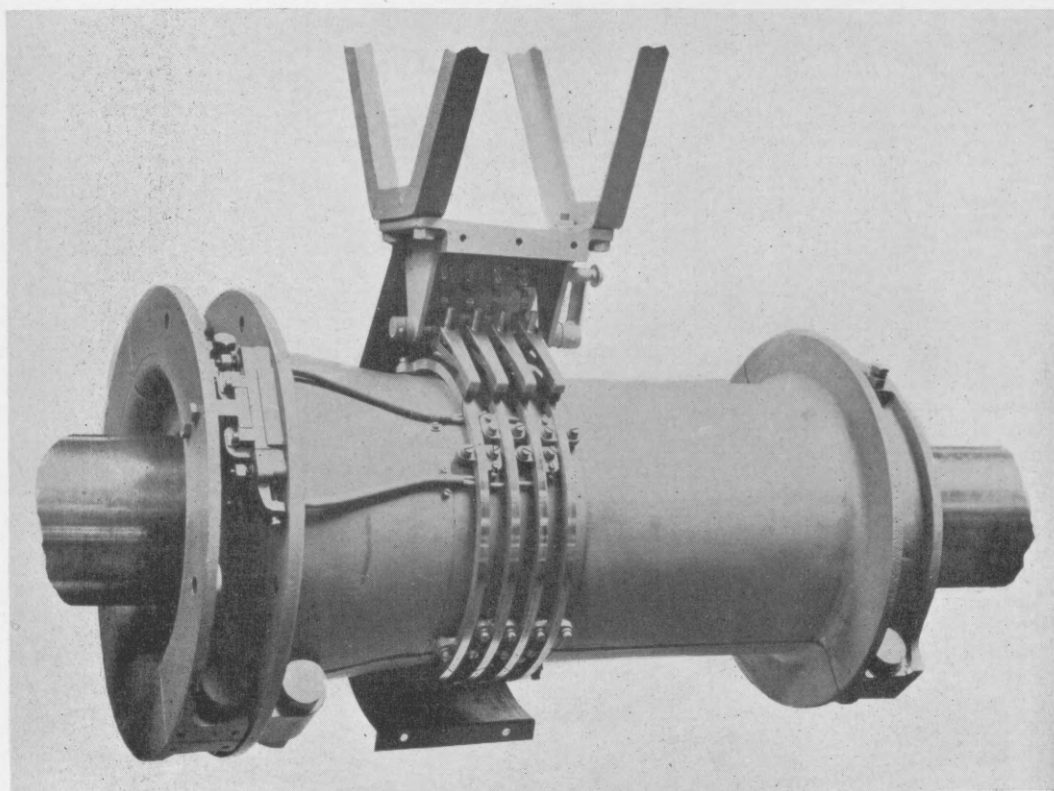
General view of the torsionmeter fitted on the propeller shaft
